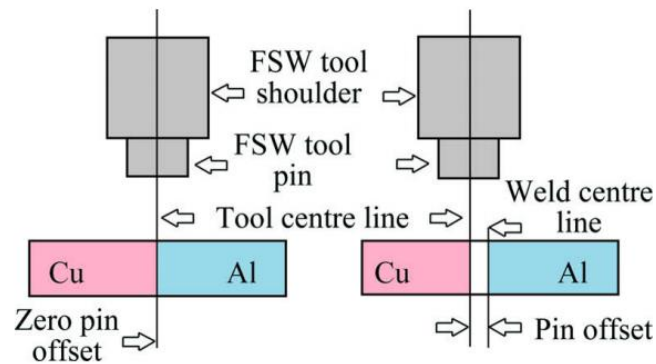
Schematic of tool workpiece position for pin offset [1, 19]
